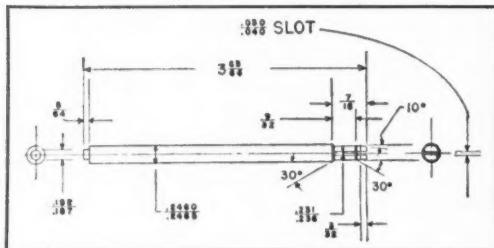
Sketch of stainless steel inlet manifold heater valve shaft slotted with the aid of the fixture shown in Fig. 2.
